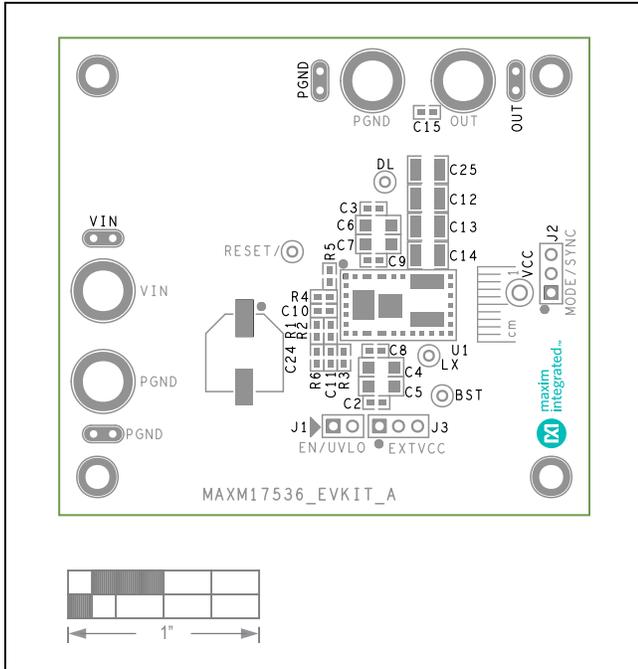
MAXM17536 5V Output EV Kit PCB Layout—Top Silkscreen
